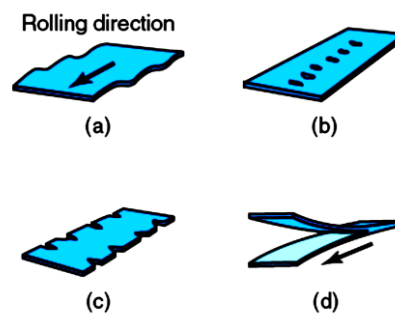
Defects in rolling (a) wavy defect (b) zipper crack (c) edge cracks
